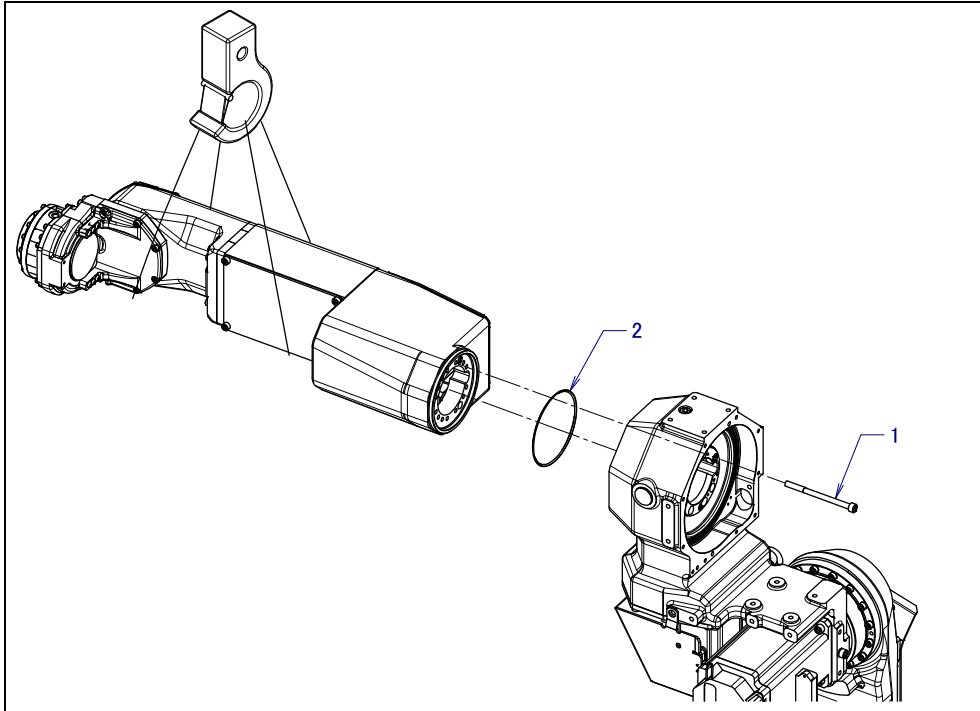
(b) Replacing the J4-axis gearbox unit (2/4)
